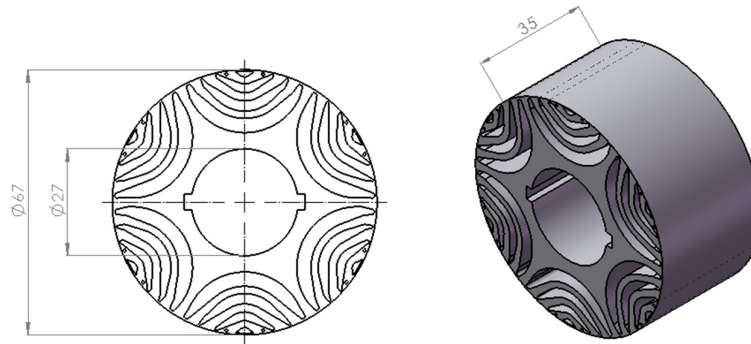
Rotor design schematics for one stack of the rear PMA SynRM traction machine (due to skew there are three stacks that complete the rotor).
